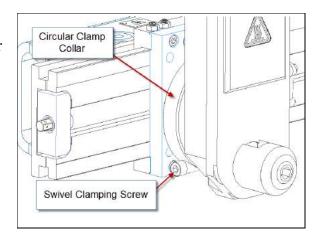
LOCATION OF SWIVEL CLAMPING SCREW
